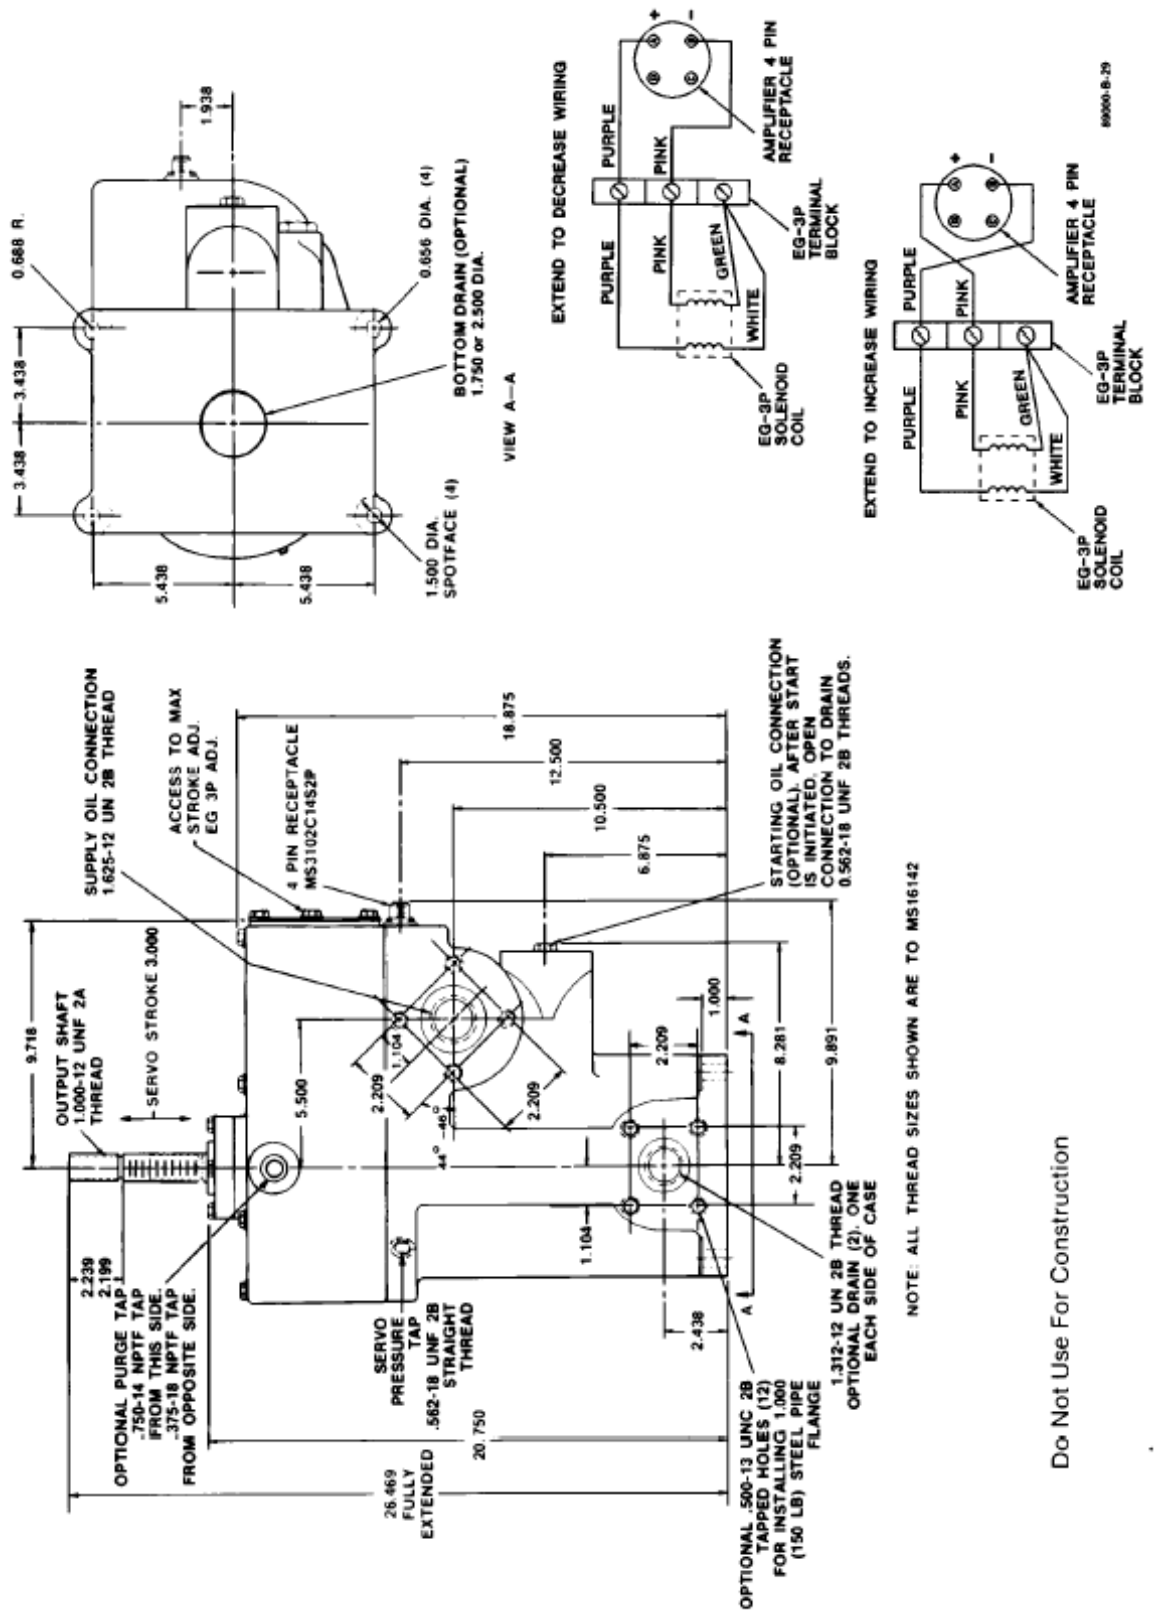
7-1/4" Hydraulic Amplifier Dimensions
